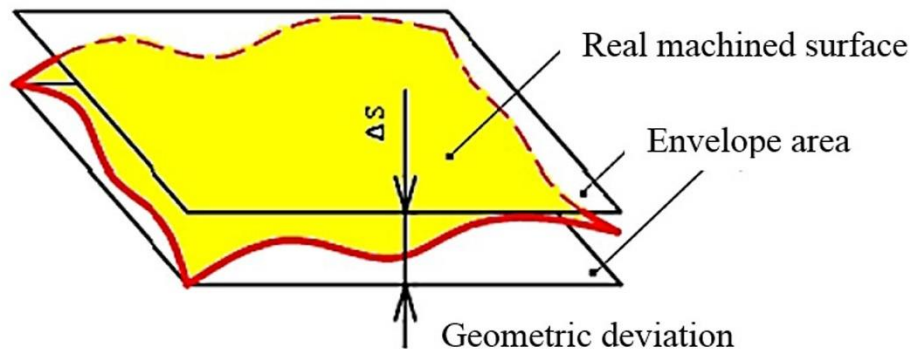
Geometric deviation in Machined surface (Straka et al., 2017)
